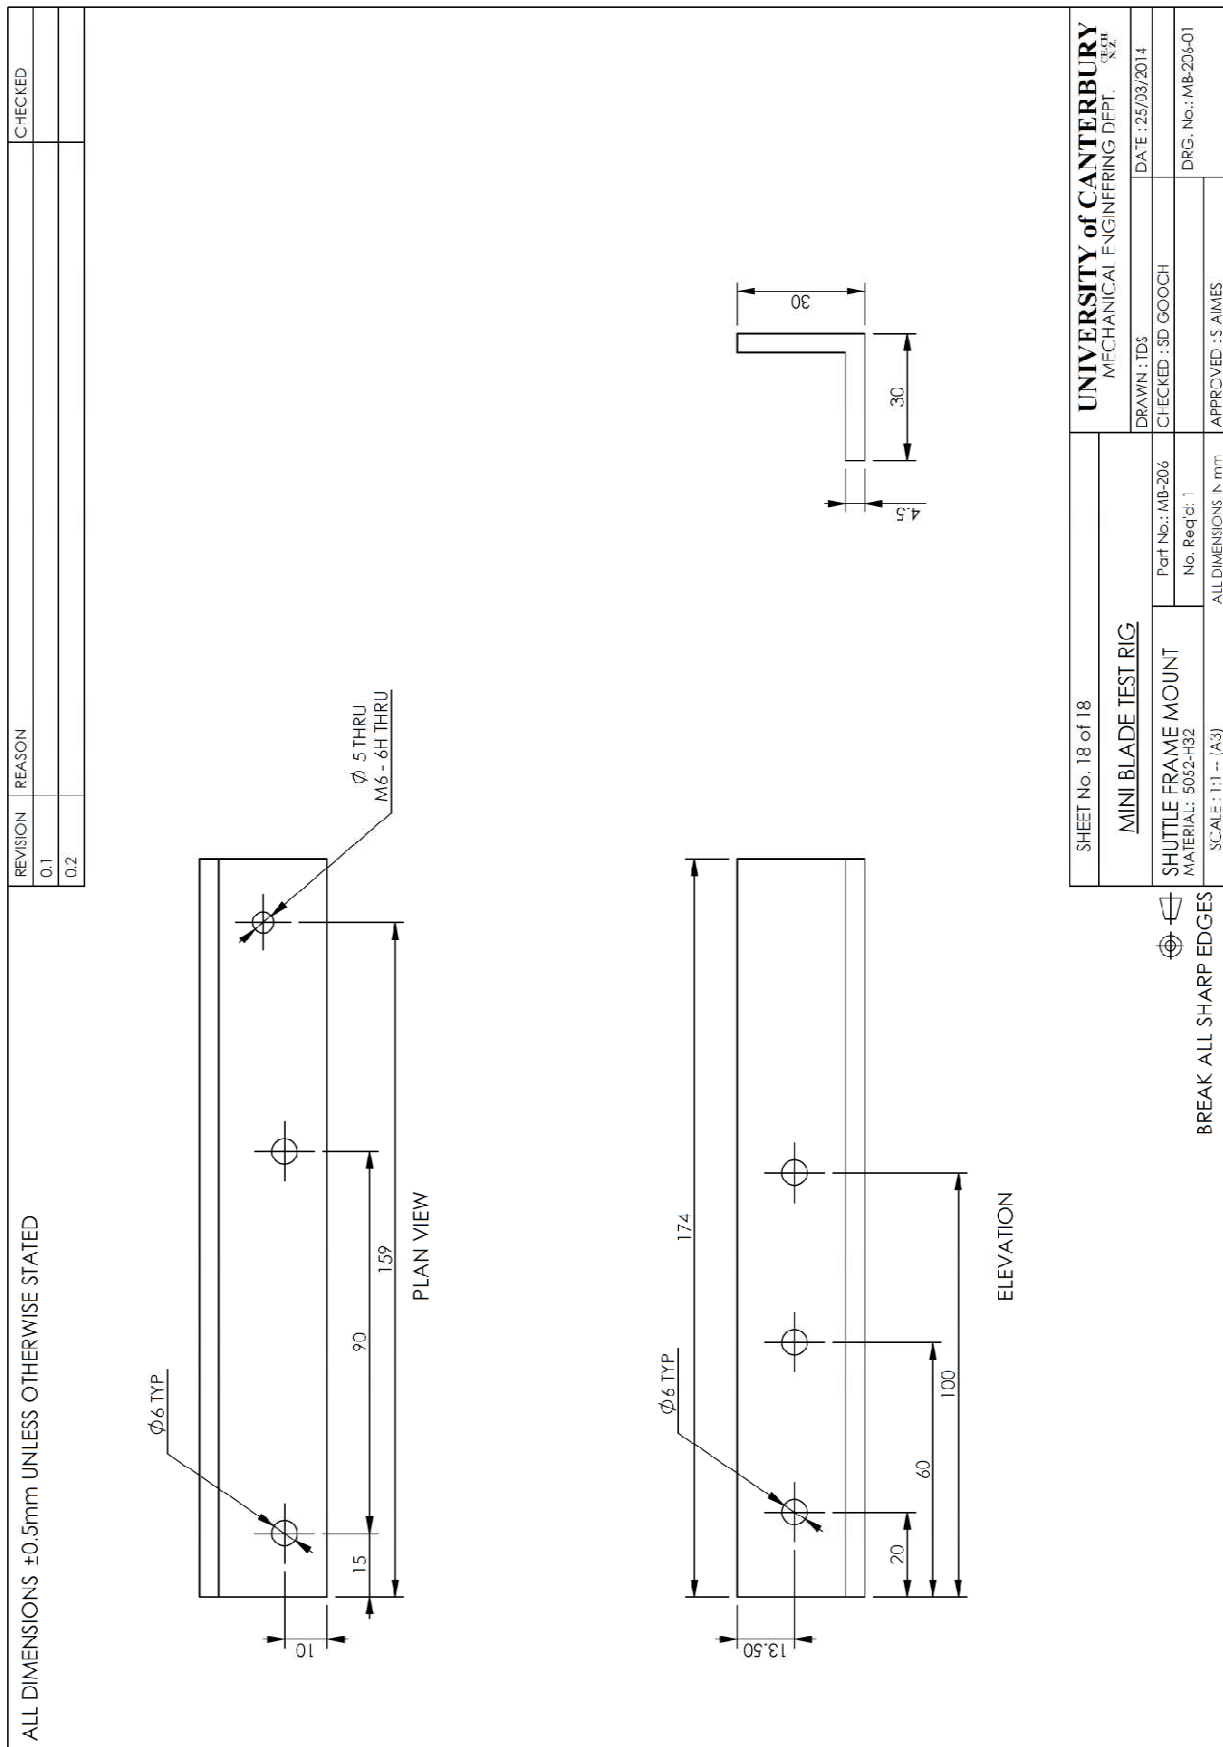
Manufacturing drawing of RH shuttle frame mount in the variable stroke test rig.
